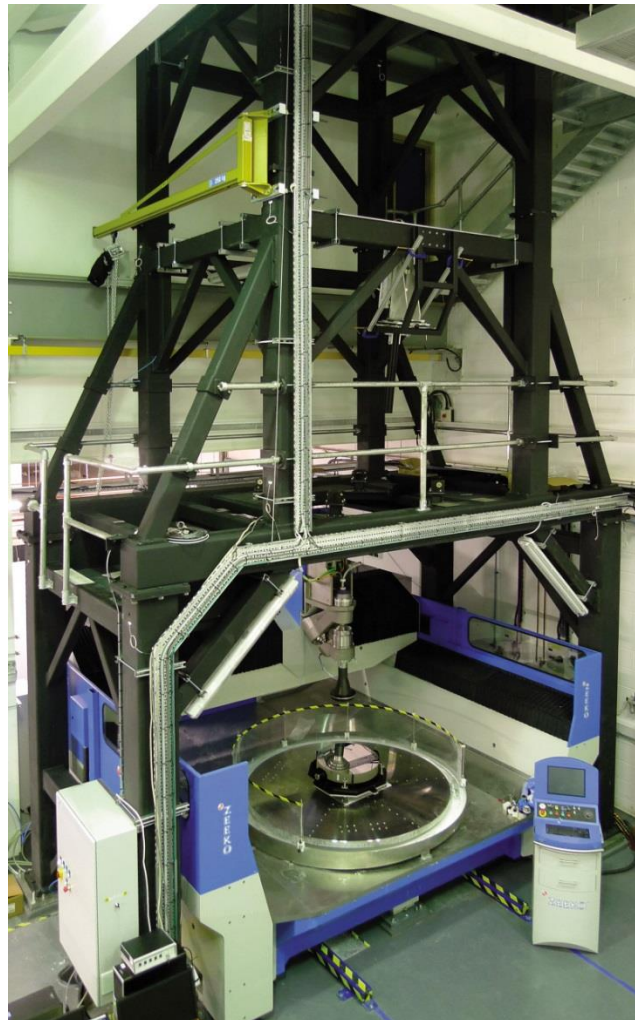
Lower path of the OpTIC Glyndwr optical testing tower used for ESO E-ELT segment full-aperture measurement (Top sphere assembly not shown)
